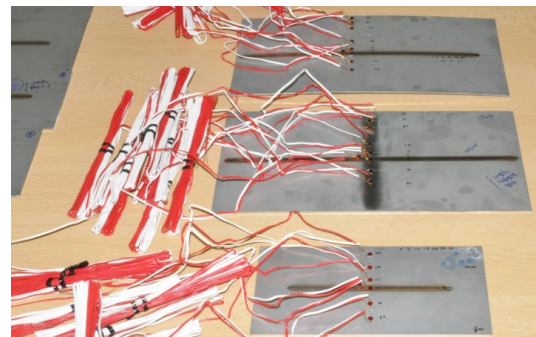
Photograph of specimens with attached strain gauges for measuring welding residual stresses.
